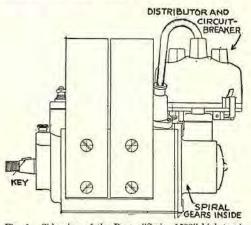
Side view of the Remy "Series 1500" high-tension magneto.
